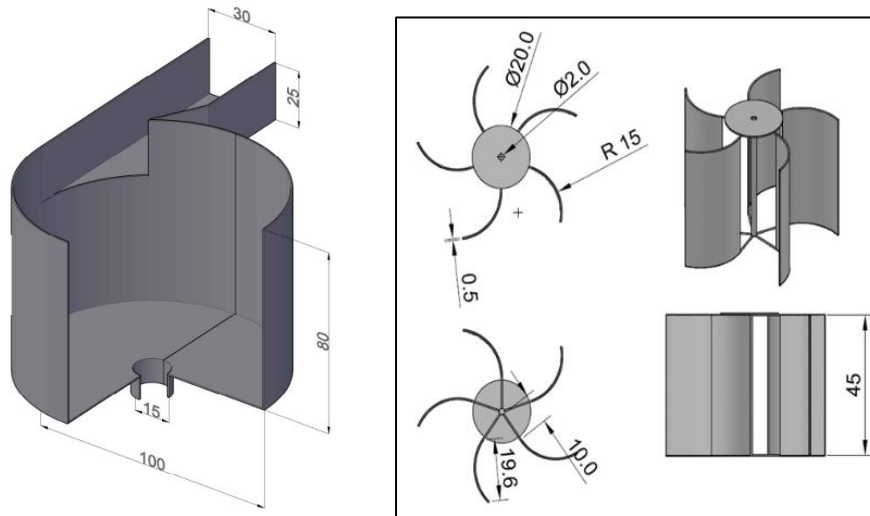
(a) Geometry design of cylindrical basin, (b) Turbine Blades Design
